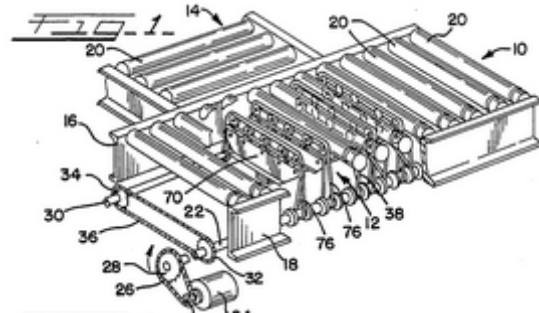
Drive belts used to move the package onto another conveyor [13].
